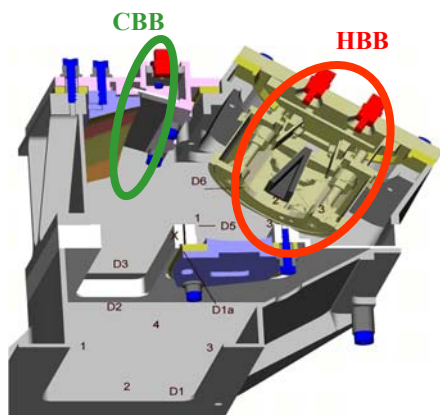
Drawing of the Calibration Source Assembly (CSA) inside the HIFI FPU
